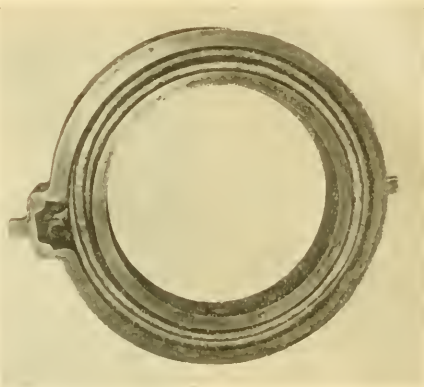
FRAME WITH COOLING COIL IN PLACE
